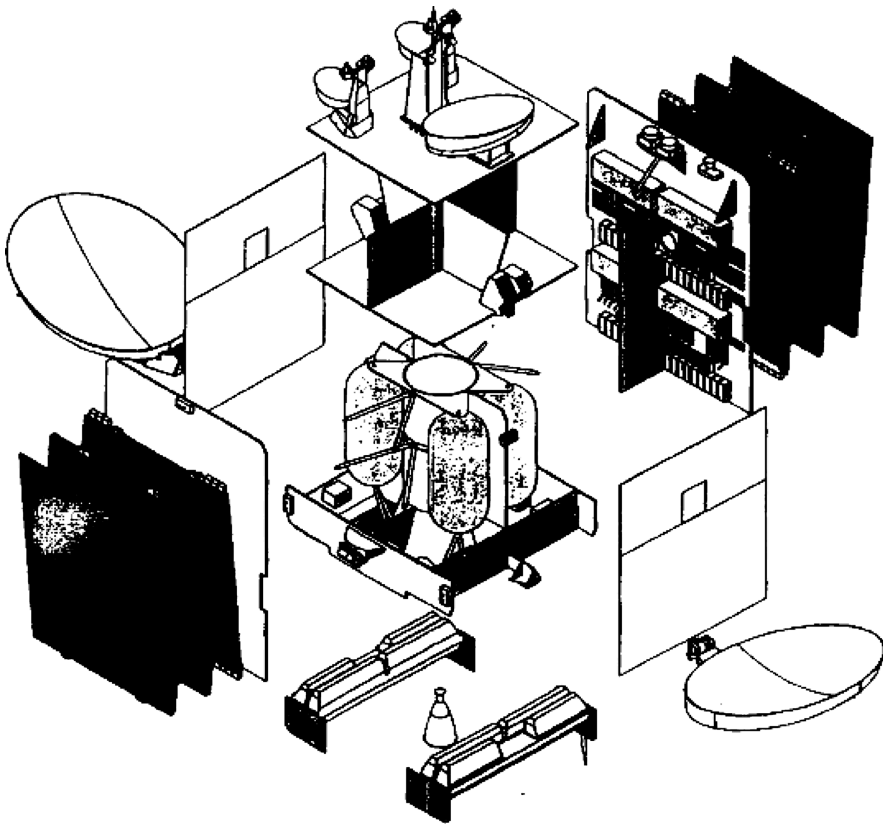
Exploded view of Eruostar3000 satellite platform.
